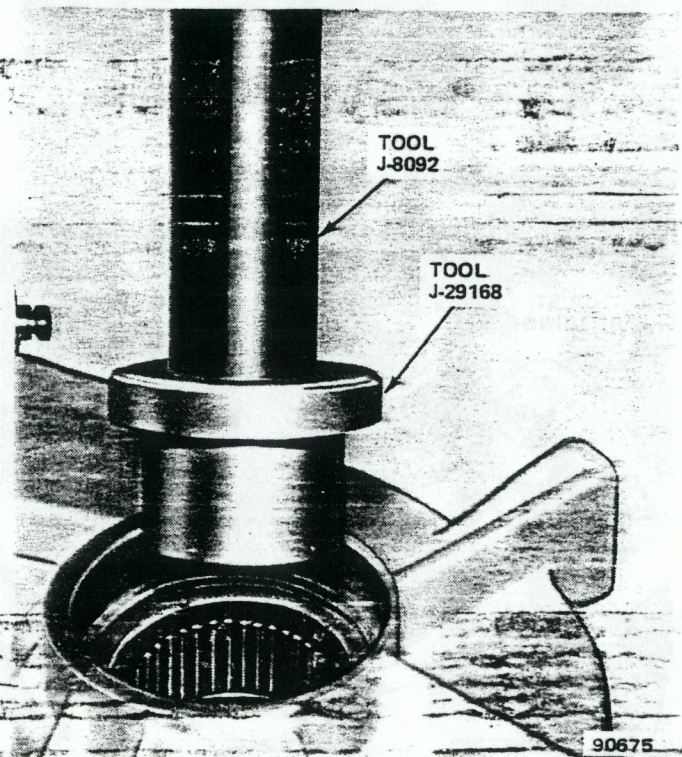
D-27 Front Output Shaft Front Bearing Removal
